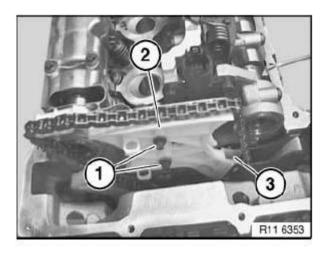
Identifying Engine Timing Chain Module, Junction And Screws
